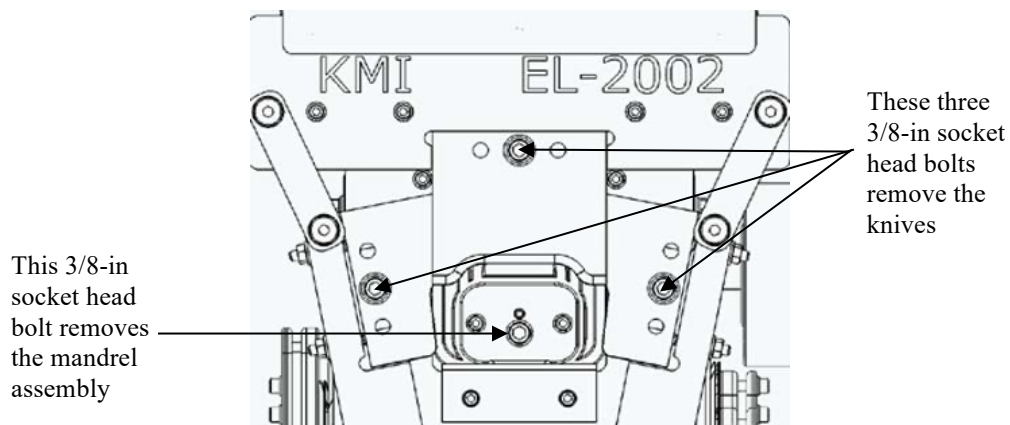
Front view of knives and mandrel assembly to be exchanged.
